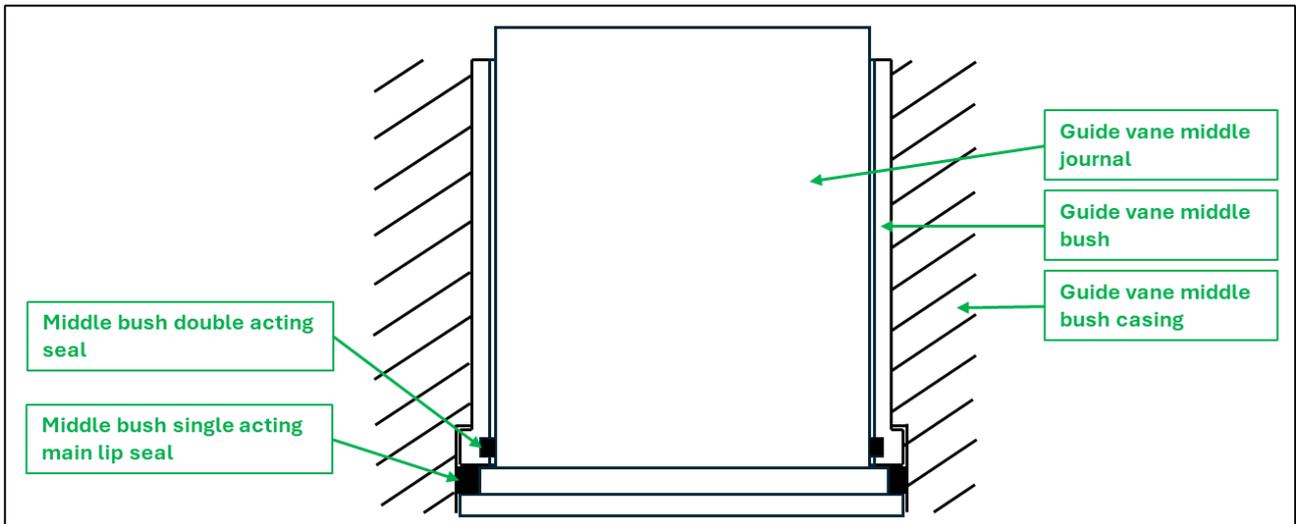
Guide vane middle bush & journal assembly illustrating location of seals
